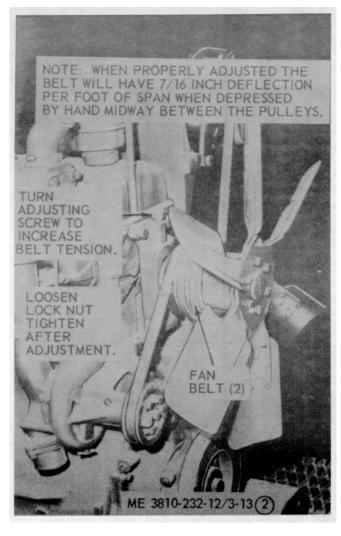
Crane engine V-belt adjustment. Sheet 2 of 3.
